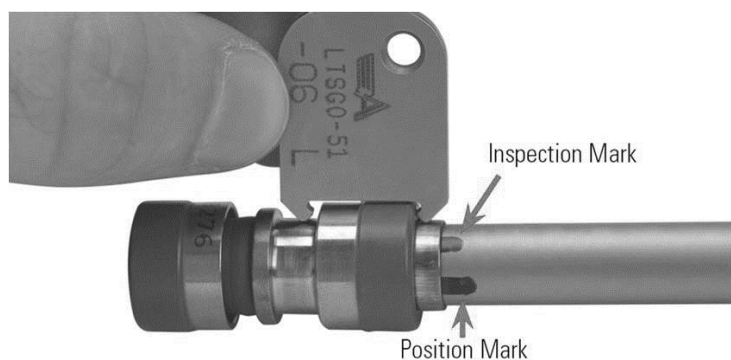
Using a Rynglok go/no-go gauge (complete/incomplete ring advancement inspection).
